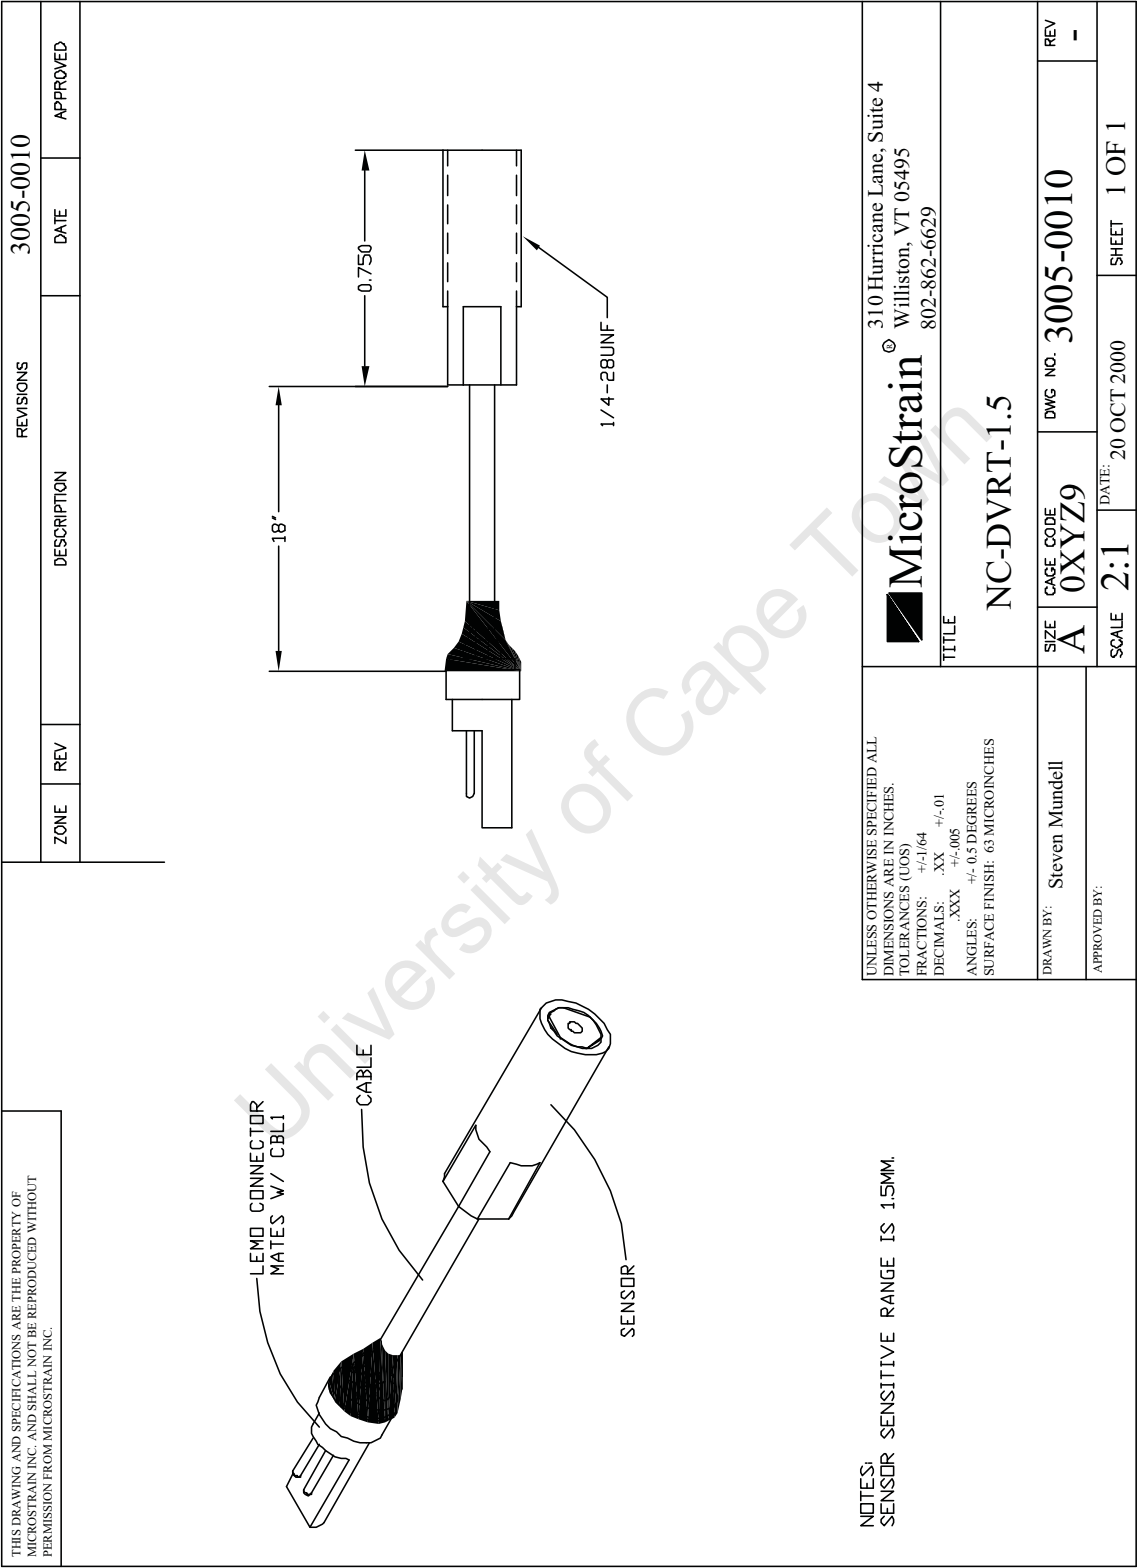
Technical Drawing: Microstrain Sensor NC-DVRT-1.5.
